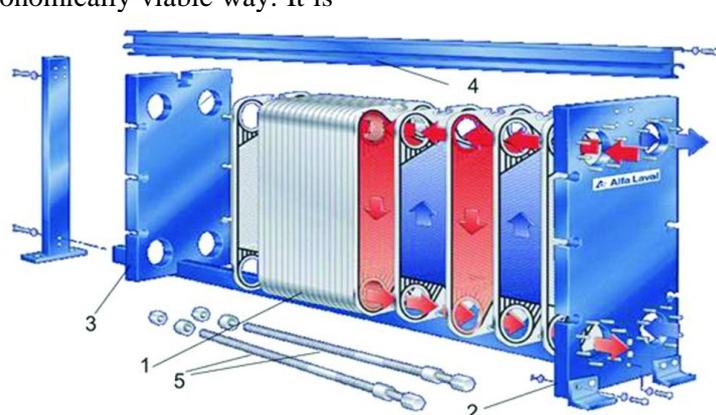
The example of PHE drawing: 1 – heat transfer plate; 2 – fixed frame plate; 3 – moving frame plate; 4 – carrying bar; 5 – tightening bolts.
